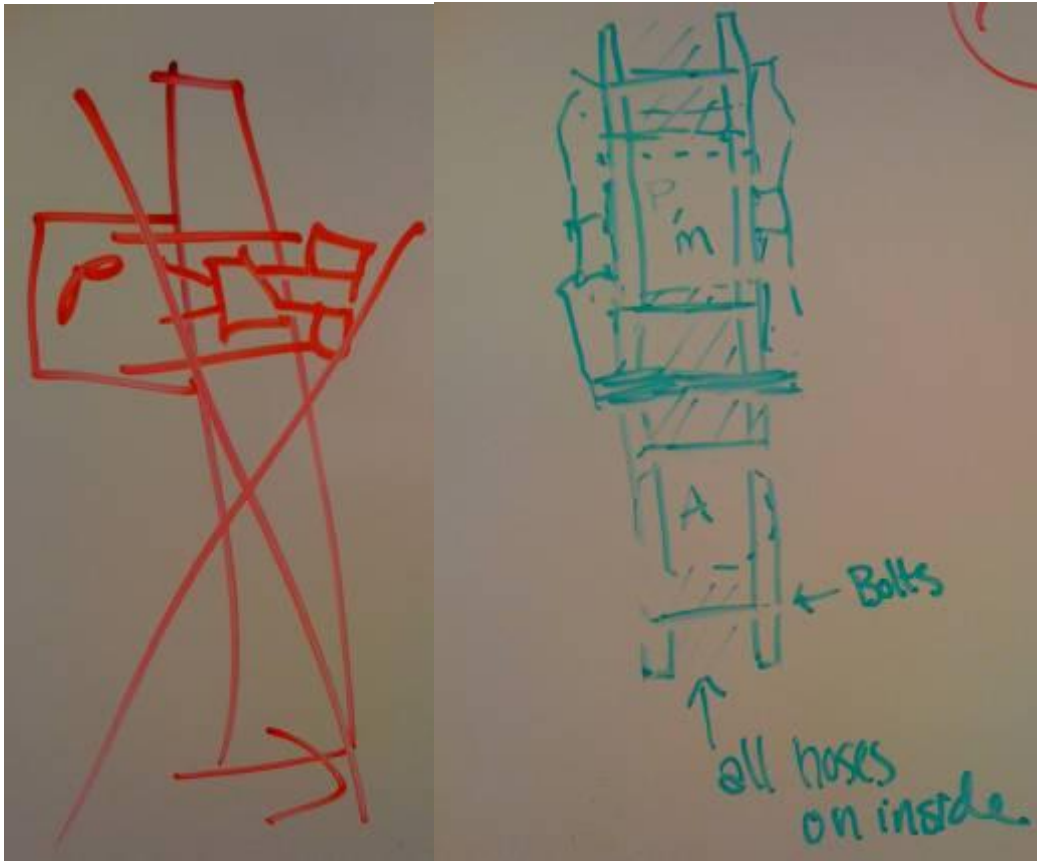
Figure 38 shows a rejected power transfer concept in which the superbracket holds roller bearings that encompass the pump shaft for support. Figure 15 illustrates superbracket concept 2, where the hydraulic components are sandwiched between two thin brackets.
